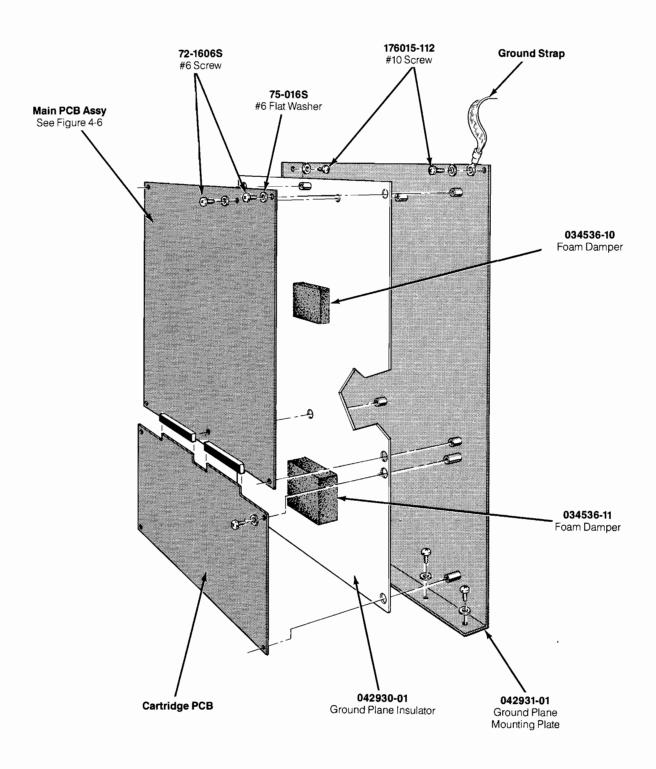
Printed-Circuit Board Mounting Hardware A042932-01 A
